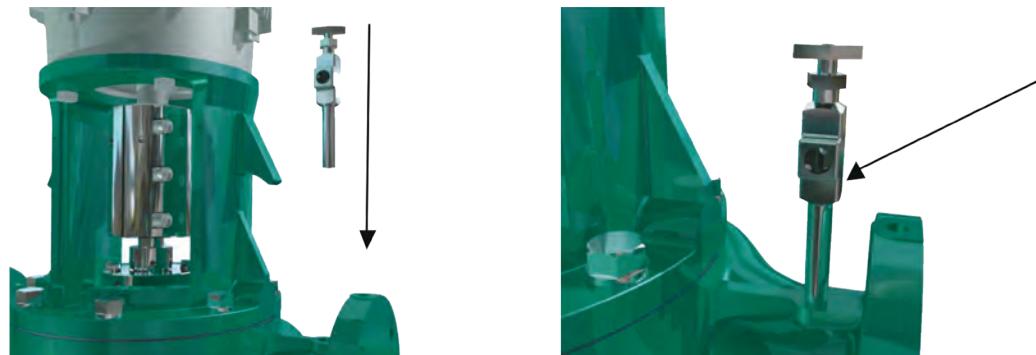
Inserting the vent assembly into its corresponding position on the casing.
